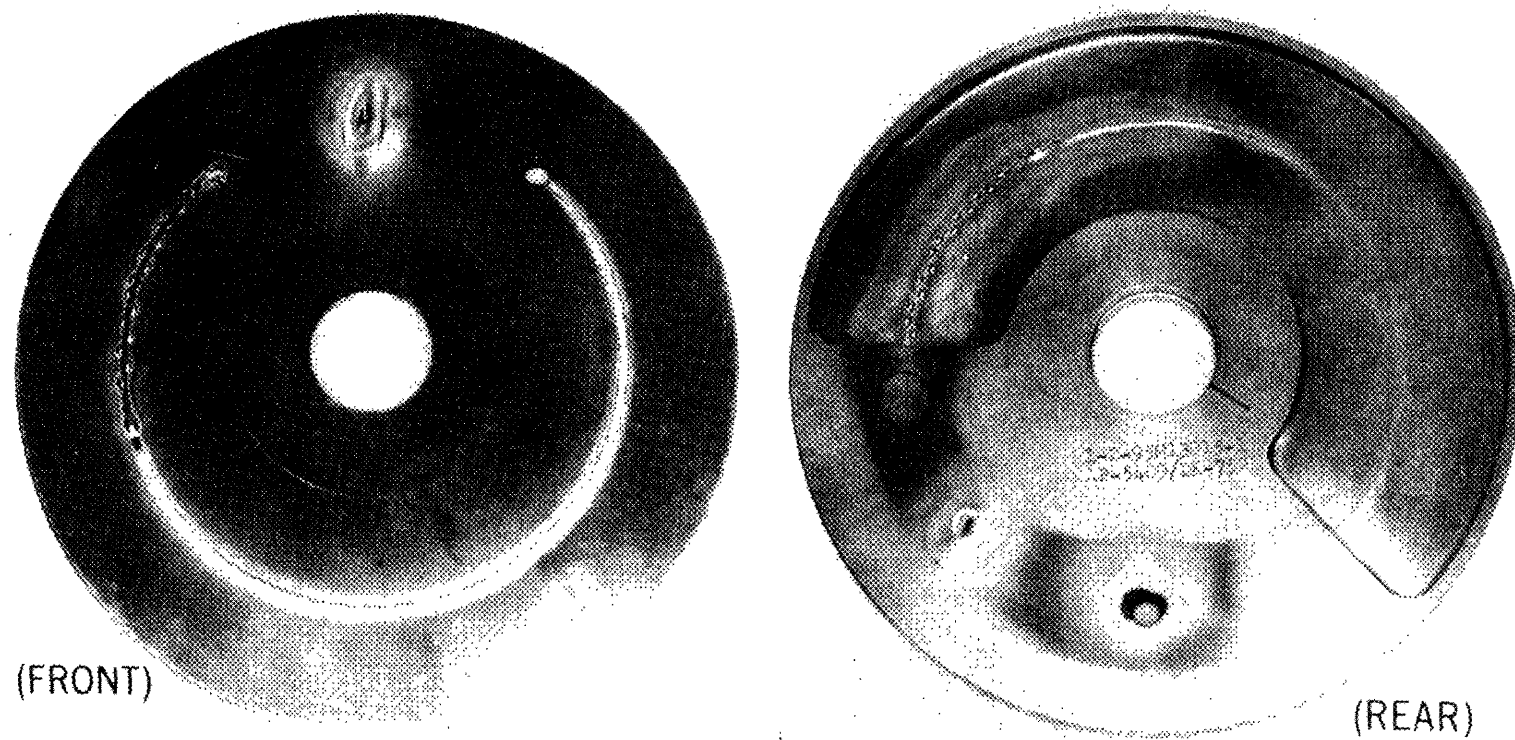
SKYLAB STAINLESS STEEL SAMPLE
